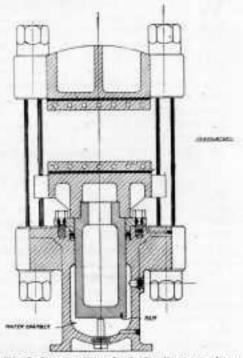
Gross section of a hydraulic press, showing the water chamber and the ram which lifts the lower plate to compress the molds
